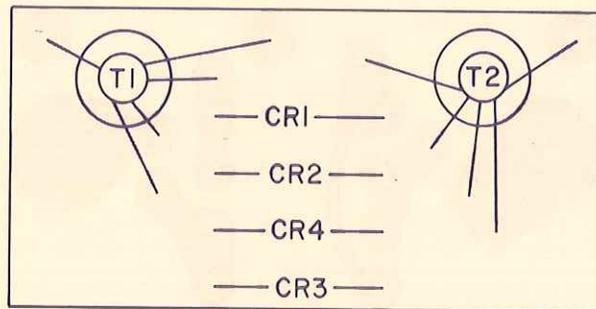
Part 16456 Balanced Mixer Board (A5A1),
